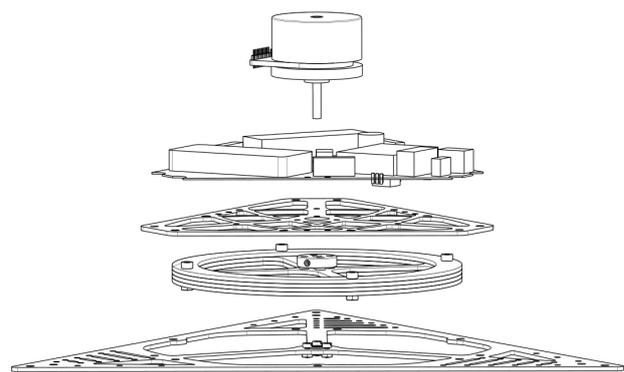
Face assembly group of the *TSIP*-Demonstrator.
